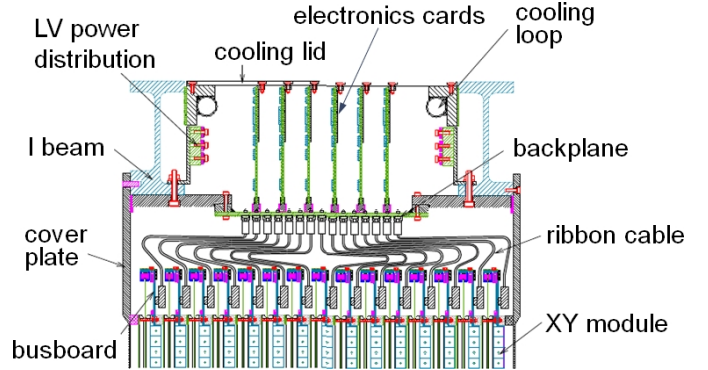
Cross-sectional view through a minicrate, showing the electronics cards, I beams, cooling and power bars, and backplane.
